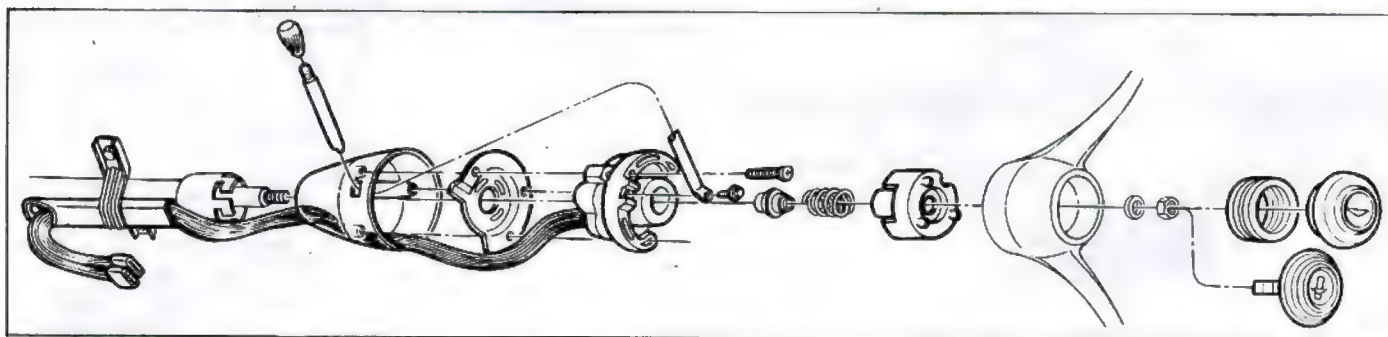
Exploded View of Mast Jacket and Steering Wheel
